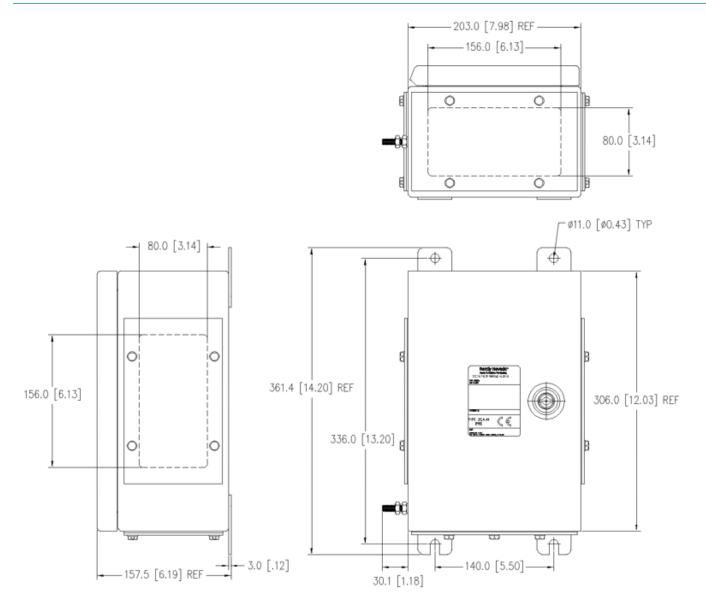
176467 3300 XL Multi-Purpose Housing Dimensions (12" x 8" x 6")
